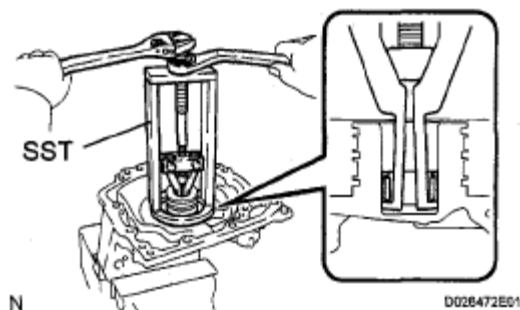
Removing Needle-Roller Bearing From Transaxle Rear Cover
